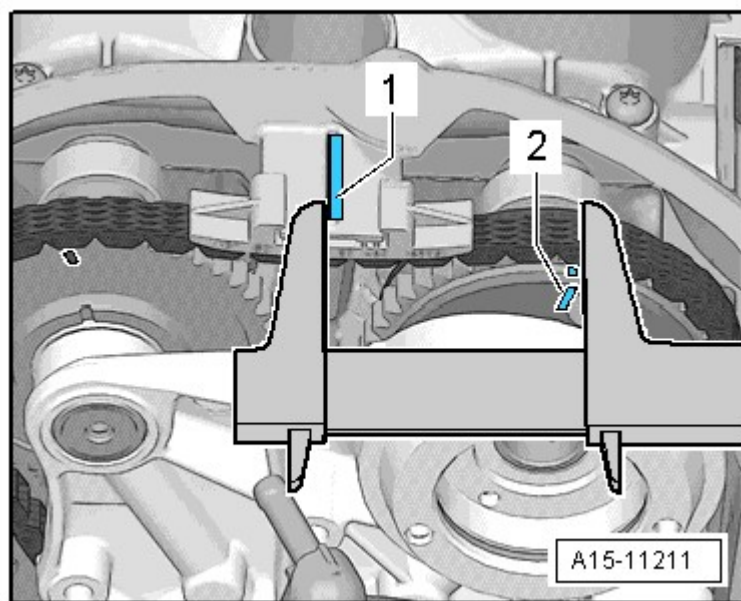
Measuring Distance From Outer Edge To Marking On Intake Camshaft
